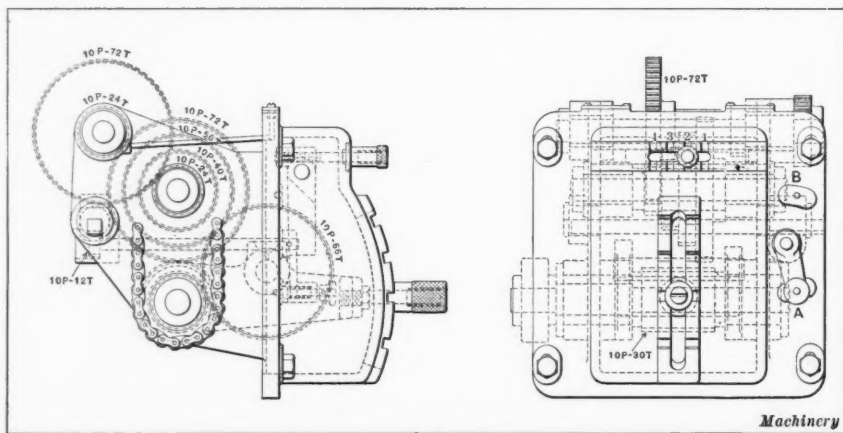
Arrangement of Gearing in Feed-box of National Milling Machine
